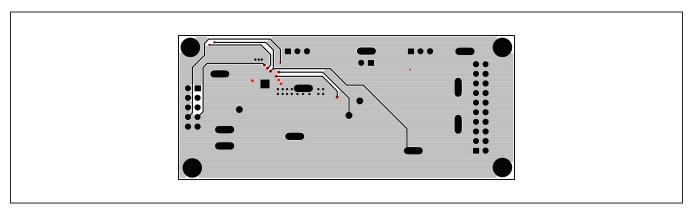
MAX20010 EV Kit PCB Layout—Layer 3
